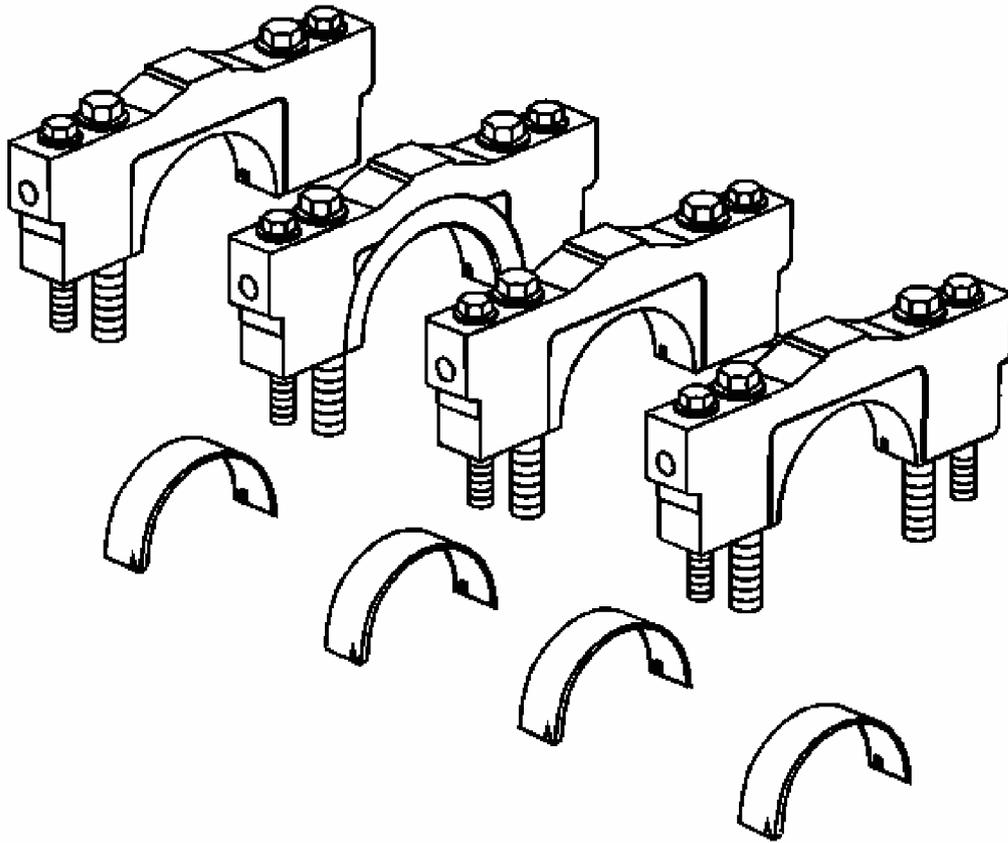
Identifying Crankshaft Lower Bearing Halves & Crankshaft Bearing Caps
